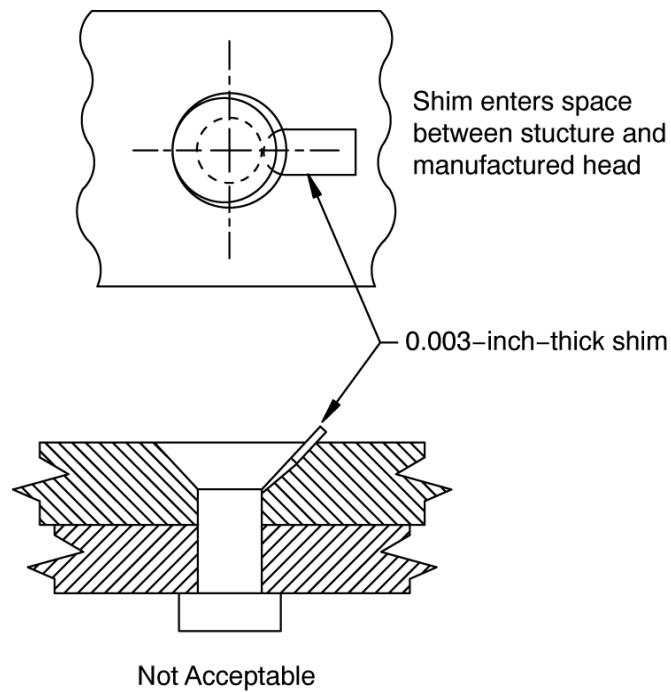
DRIVEN BUTTON GAP CHECKING METHOD
